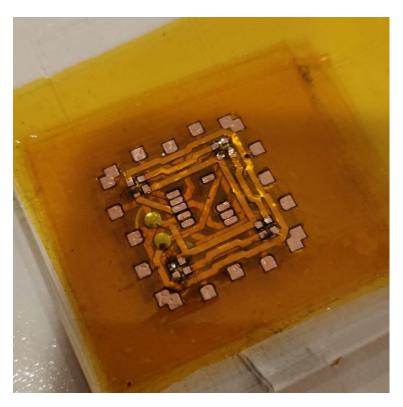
Connector and microcontroller pads cut out, the PCB is finished.
